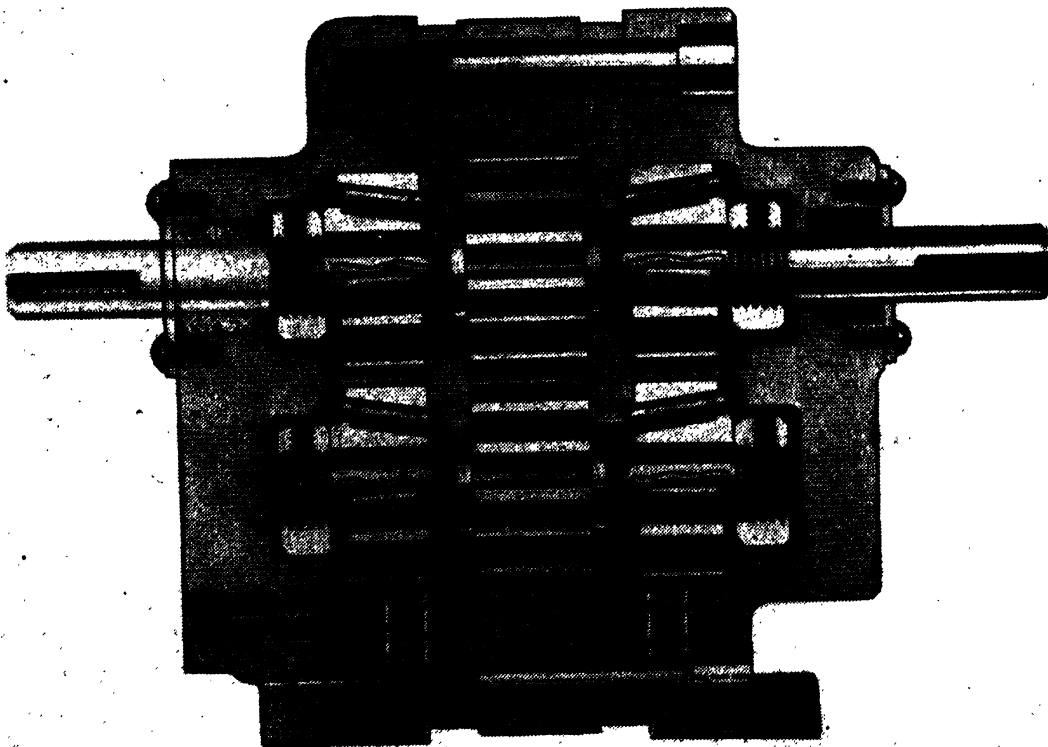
Section through gear pump. (*Hydro-Power Inc.*)
